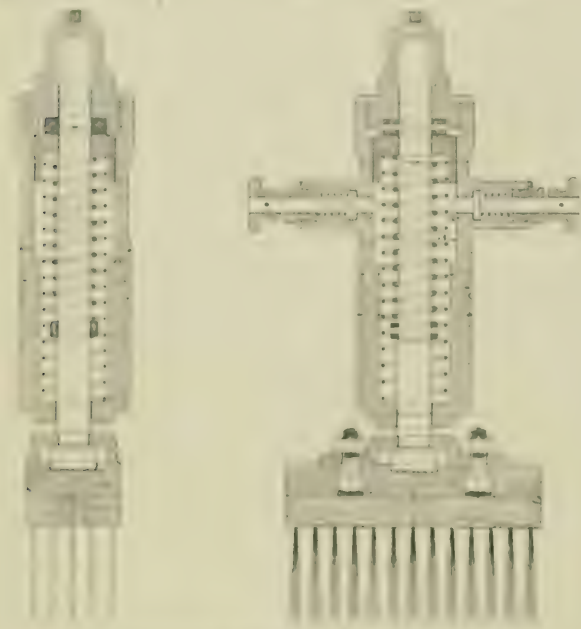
BRUSH EQUIPMENT FOR ICE REMOVAL.
